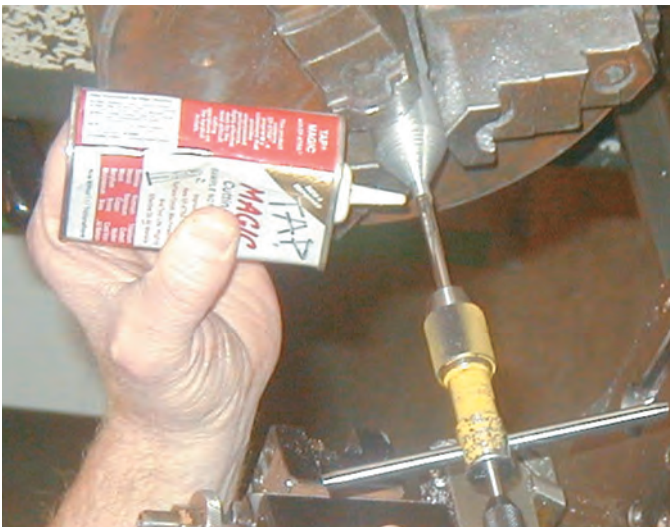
Thread-cutting compound makes a huge difference in thread quality and tool life, but it is expensive.
